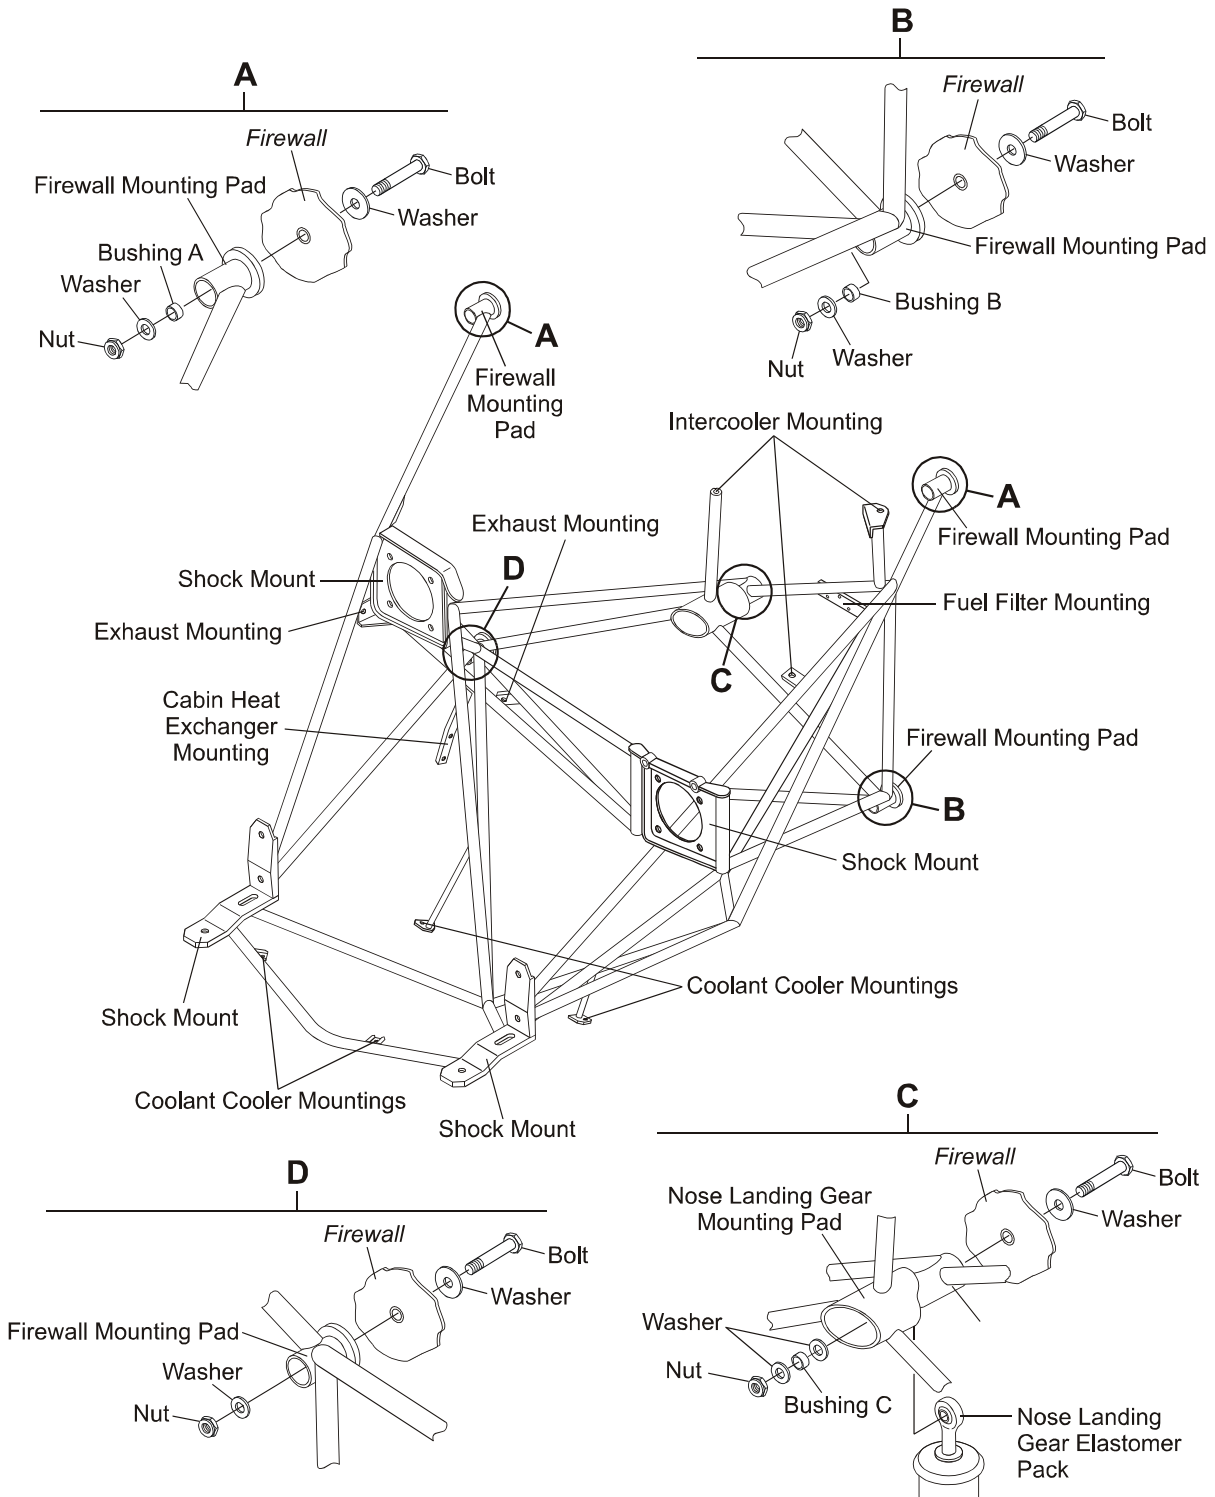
Engine Mount Assembly (if MÄM 40-434 is not installed)
